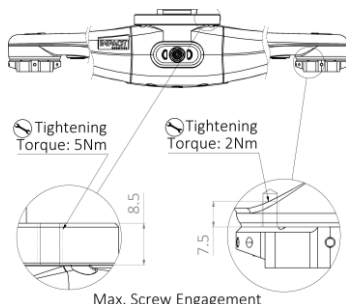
Maximum screw engagement for PQ180's robot and tool couplers
